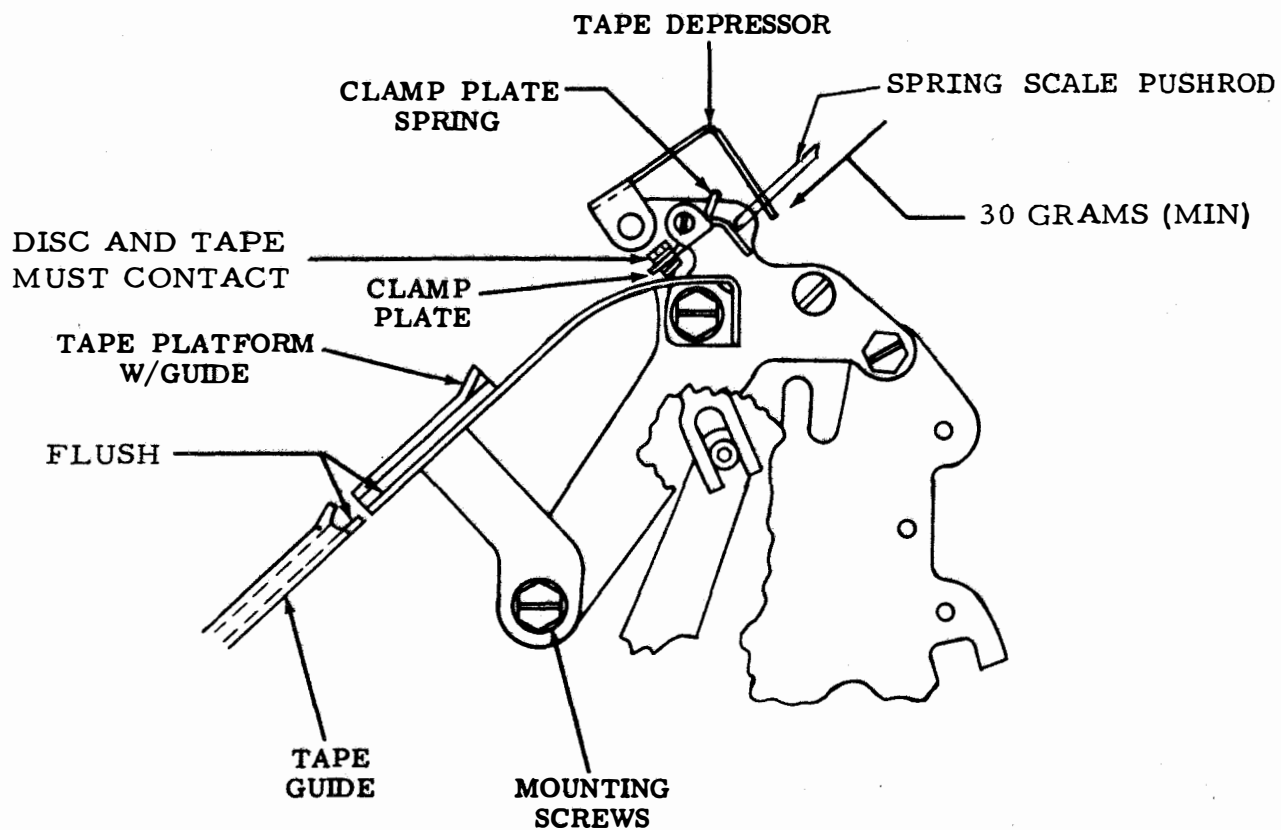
Clamp Plate Screw with Disk, Clamp Plate Spring, and Tape Platform, Front View
